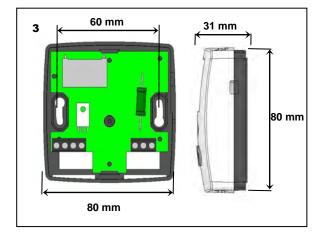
Illustration No. 3 shows the mounting holes for the attaching screws. 2-5/16" (60mm) apart.
